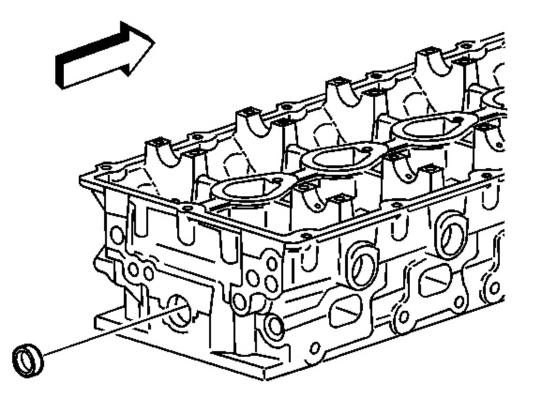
View Of Water Jacket Plug Courtesy of GENERAL MOTORS CORP.
